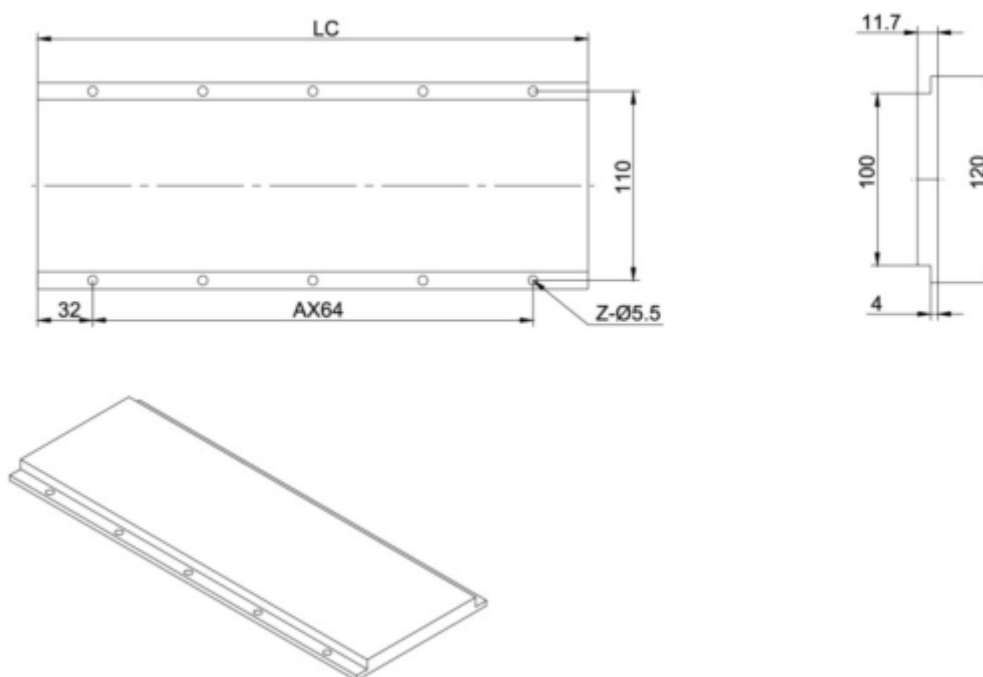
Dimensional drawing of WZCR-Z120 series stator
